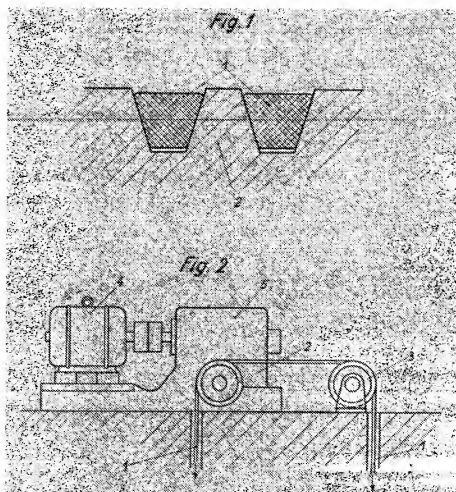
shows an arrangement example, which is allowed through the use of support elements constructed according to the innovation. In this example, the control sheave 3 is arranged above the hoist shaft at the same height as the drive sheave 2 driven by an electric motor 4 via the gearing 5. This is possible, because the entwining angle of 90° in the case of the use of drive ropes 1 constructed according to the innovation is sufficient in order to reliably transfer the resulting forces. As long as the material of the drive ropes is sufficiently flexible, both the drive sheave and also the control sheave can be constructed - as shown - with relatively small diameters.
